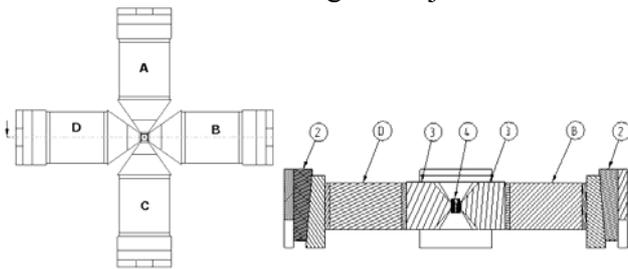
Top view and cross section of piezo based pre-stressing unit, with only actuator assembly and die shown.
